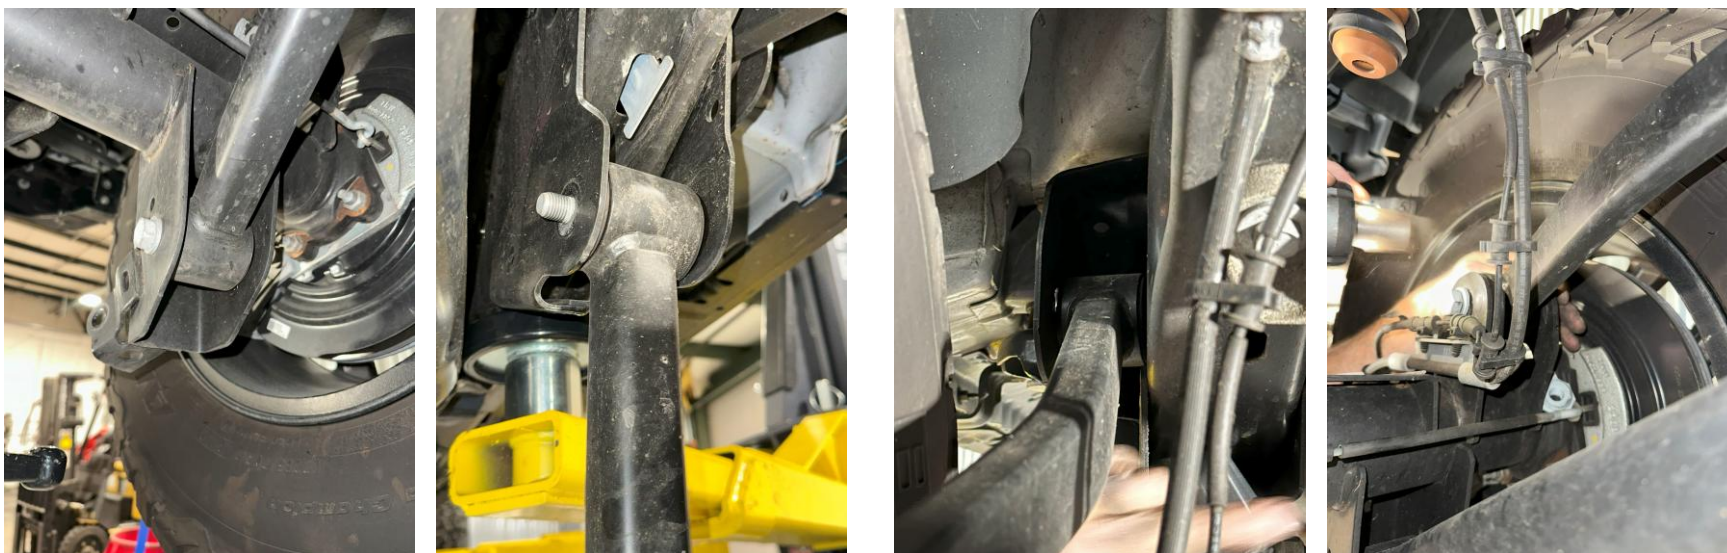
Rear control arm bolt locations (2 arms each side, 4 bolts per side, or 8 bolts total)
